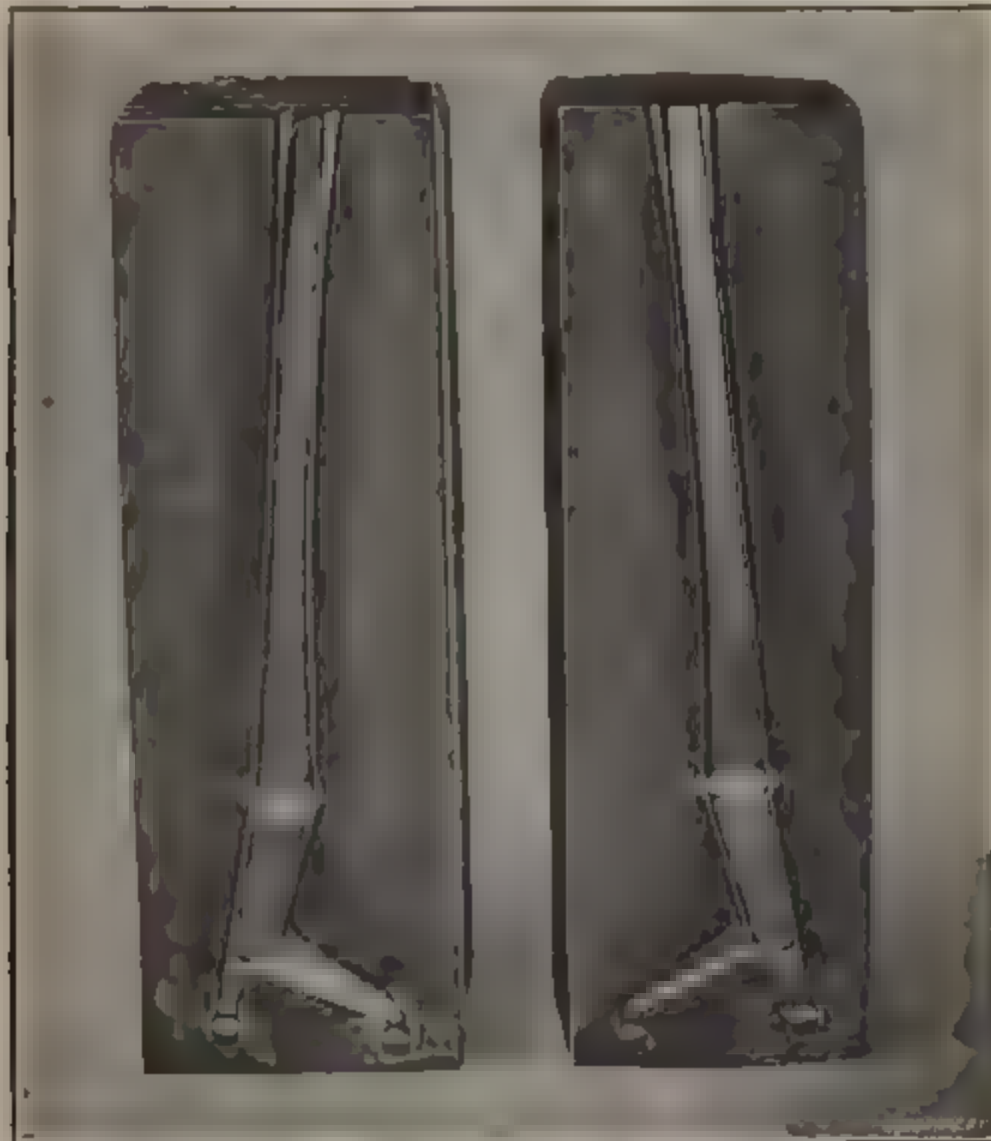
Upper and Lower Dies used in Steam Hammer shown in Fig. 19 for finish-forming the Ford Front Axle
